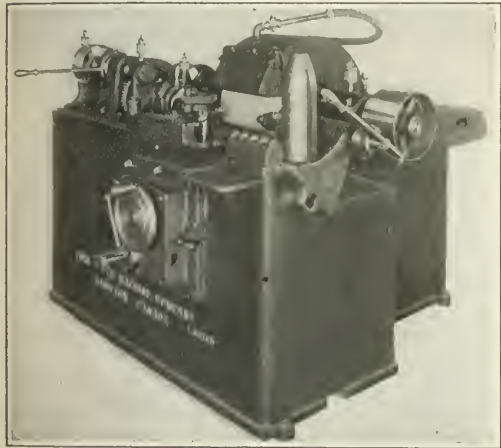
Ford-Smith Plain Wide Wheel Shell Grinder
